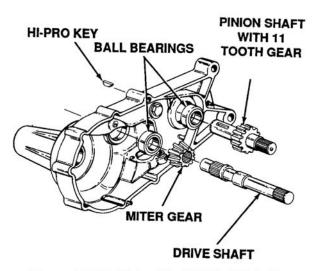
Pinion Shaft With 11 Tooth Gear Removal
